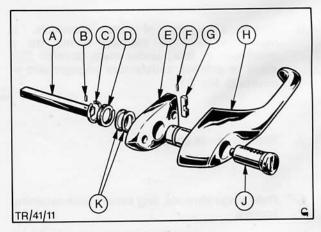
Rear door exterior handle $\begin{array}{l} A-Rod \\ B-Pin \end{array}$
